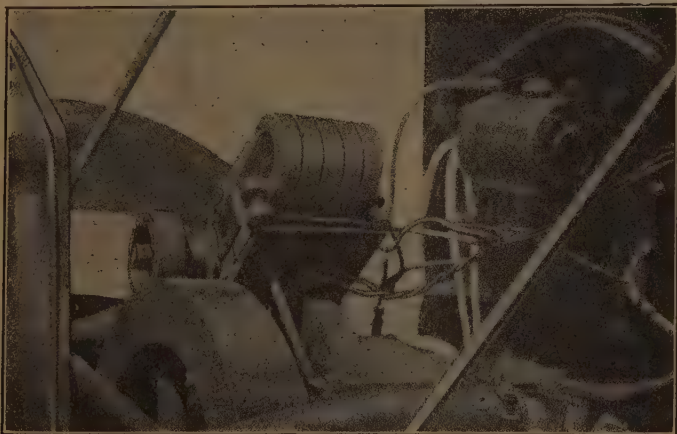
,030.—Method of driving a generator direct from engine fly wheel by friction pulley with spring or cushion base; the latter relieves the stress on the shaft from excessive vibration. The governor regulates the speed of the machine and prevents burning out of the lamps. The illustration shows a K-W magneto installed on an early Maxwell car.
